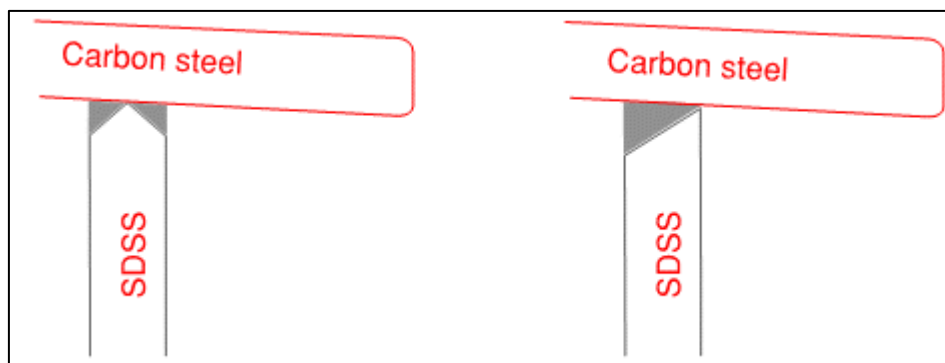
Weld between top and side plates designed with an overhang.
